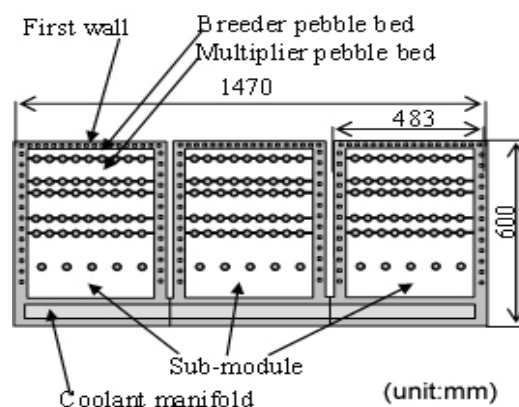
Structure of Typical Cross Sections of the HCSB TBM. [4.4-2]
